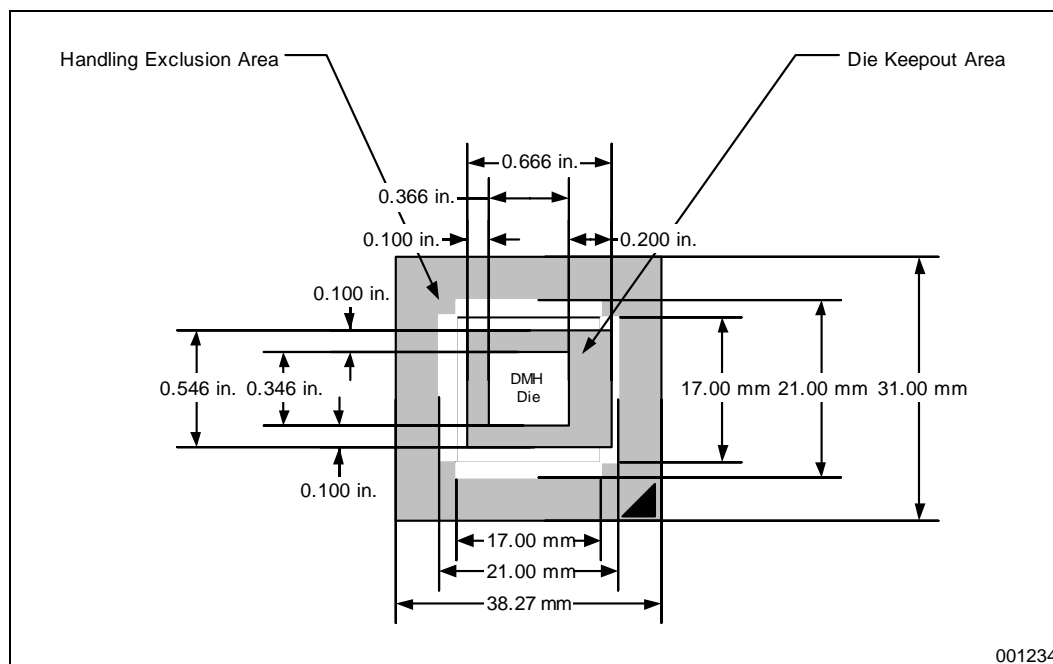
567-Ball (DMH) OLGA1 Package Dimensions – Bottom View
